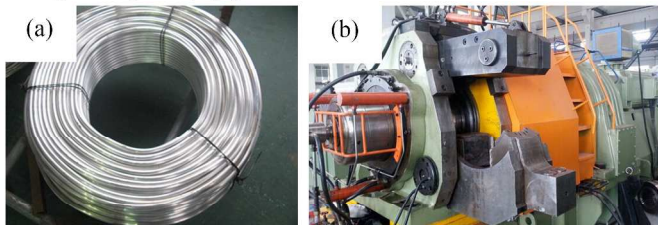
(a) Purchased extruded AZ31 magnesium rod in 20 diameter, (b) TLJ400 continuous extrusion machine
